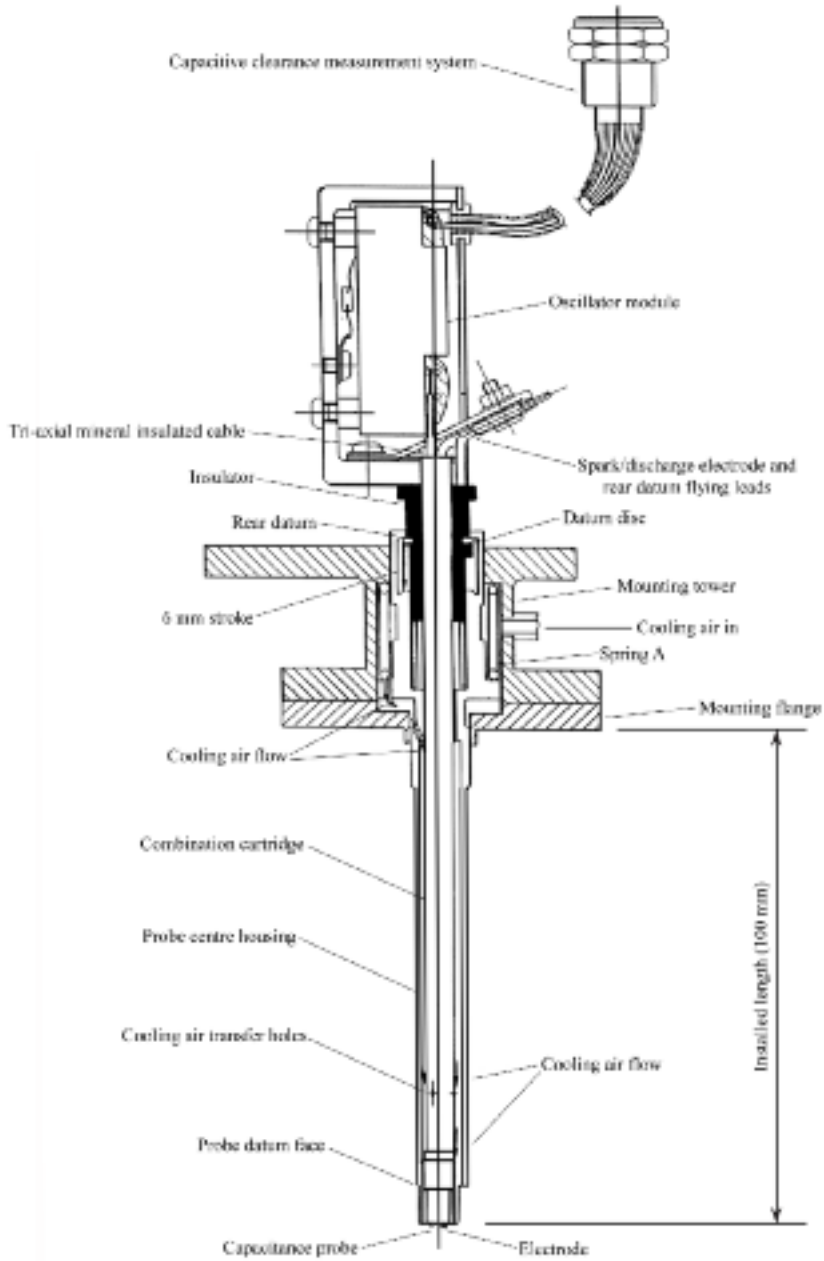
A 100 mm installed length, 6 mm stroke blade-by-blade electromechanical clearance measurement system probe.
